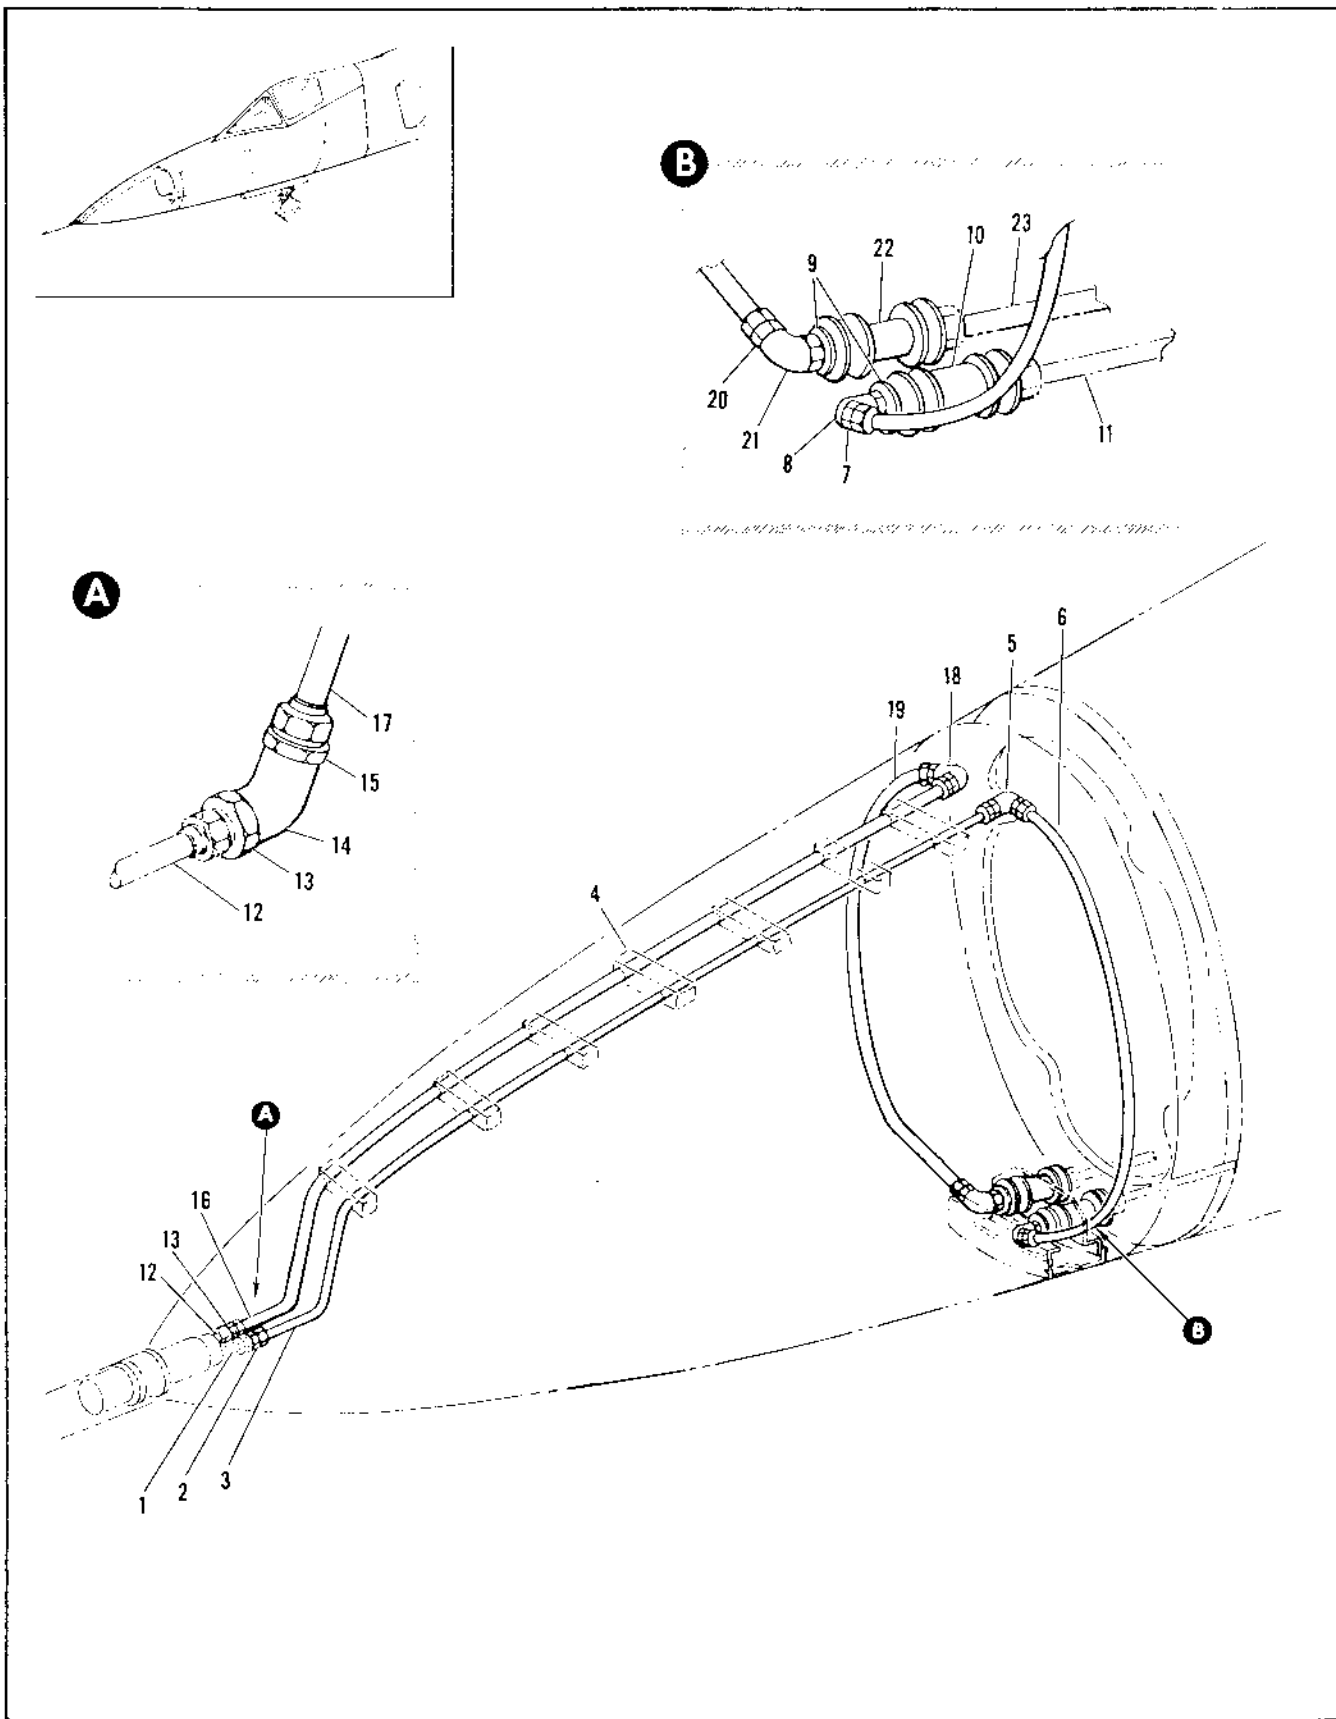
Airspeed Tubing Installation Sta - 44 to 41
